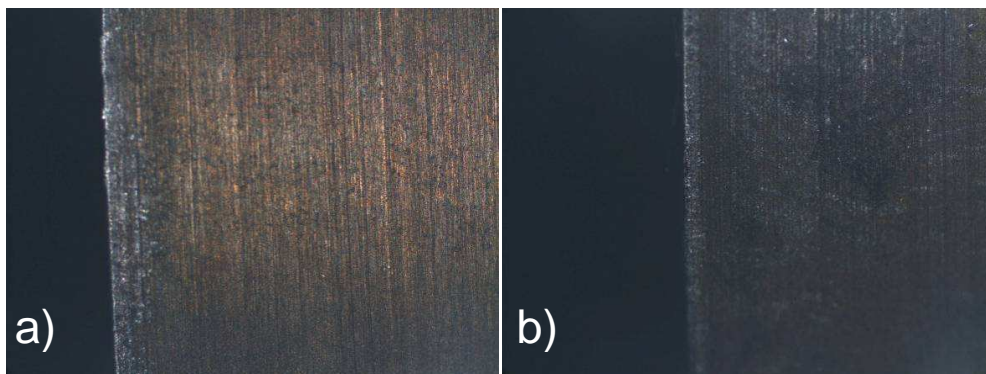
Flank wear after 2min of machining with flood lubrication (x50).
